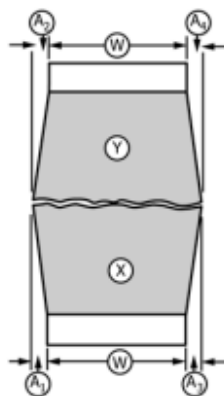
Halves of Broken Charpy V-Notch Impact Specimen Illustrating the Measurement of Lateral Expansion, Dimensions A_1 , A_2 , A_3 , A_4 and Original Width, Dimension W
